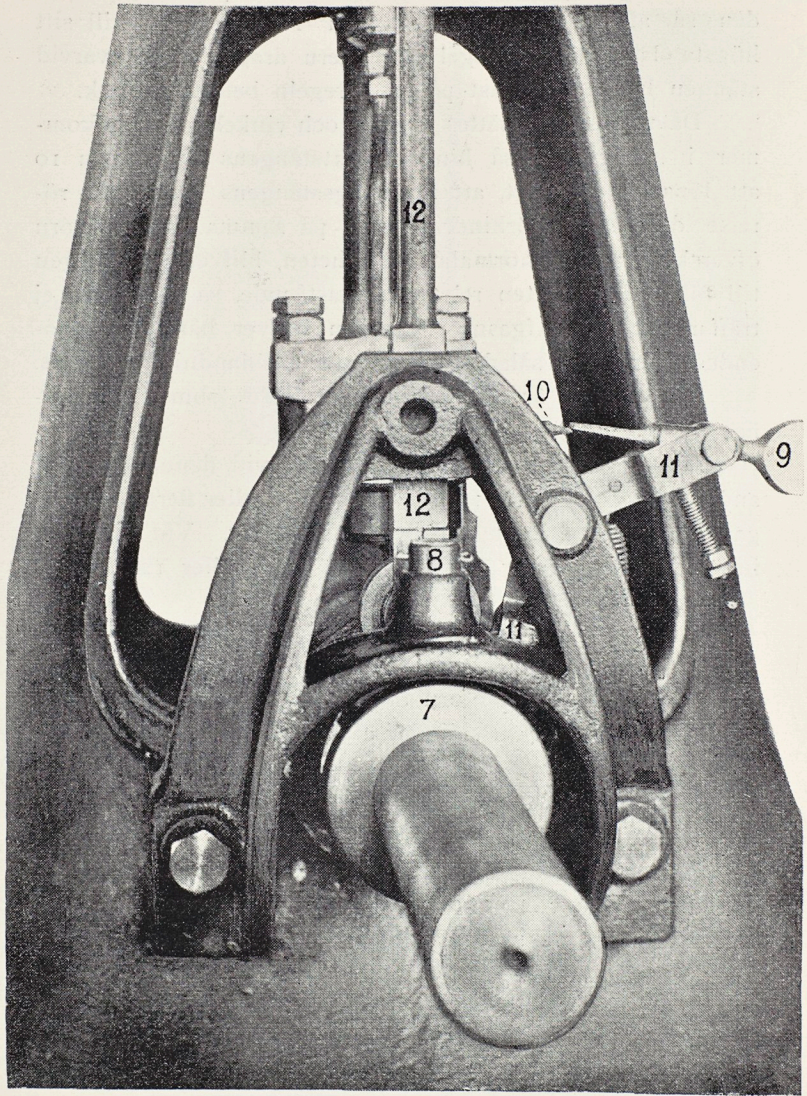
Mechanism for the regulation of the steam pressure in the cylinder of a steam engine.
